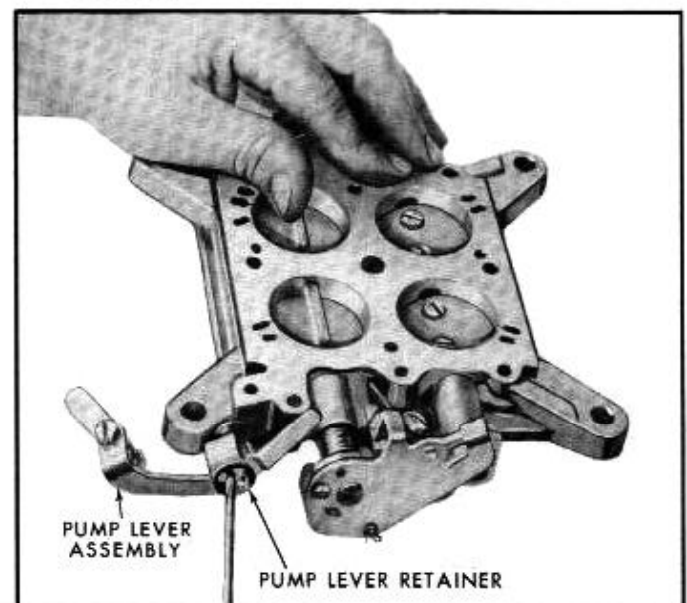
D-41—Removing Fuel Pump Lever Retainer
